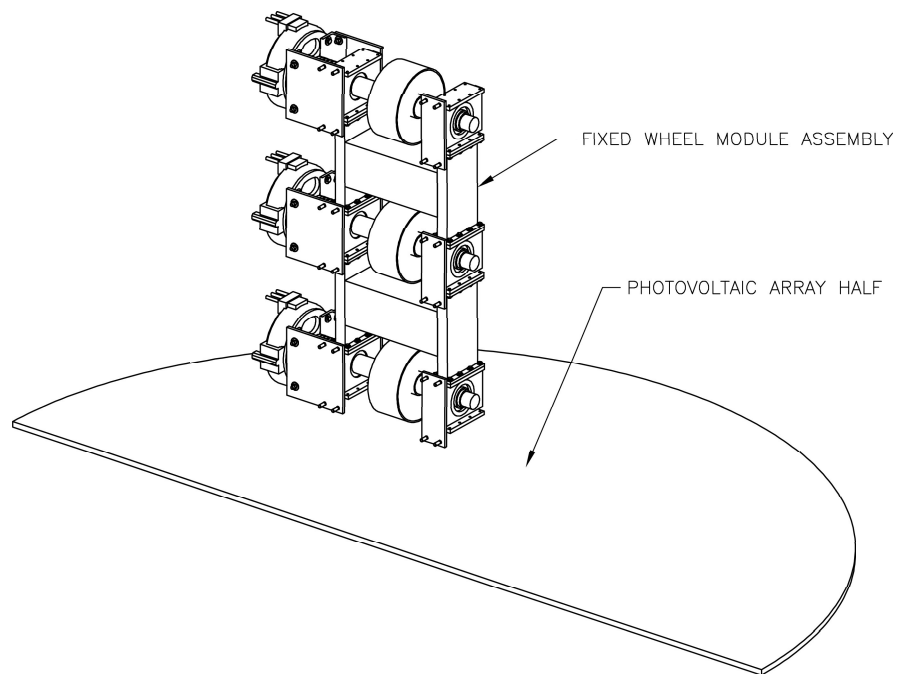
This picture shows the assembly of the fixed wheel modules. The bearings that support the axle are mounted in blocks that are fixed to the climber structure. Without the structural interface modules, the bearing assemblies on opposite sides of the wheel are free to rotate with respect to each other in both styles of modules.
